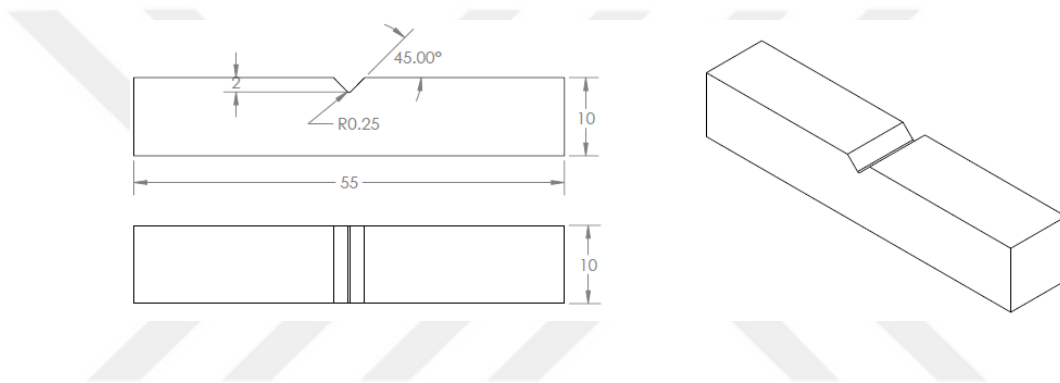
'Charpy v-notch impact test sample dimensions, ASTM E23'
